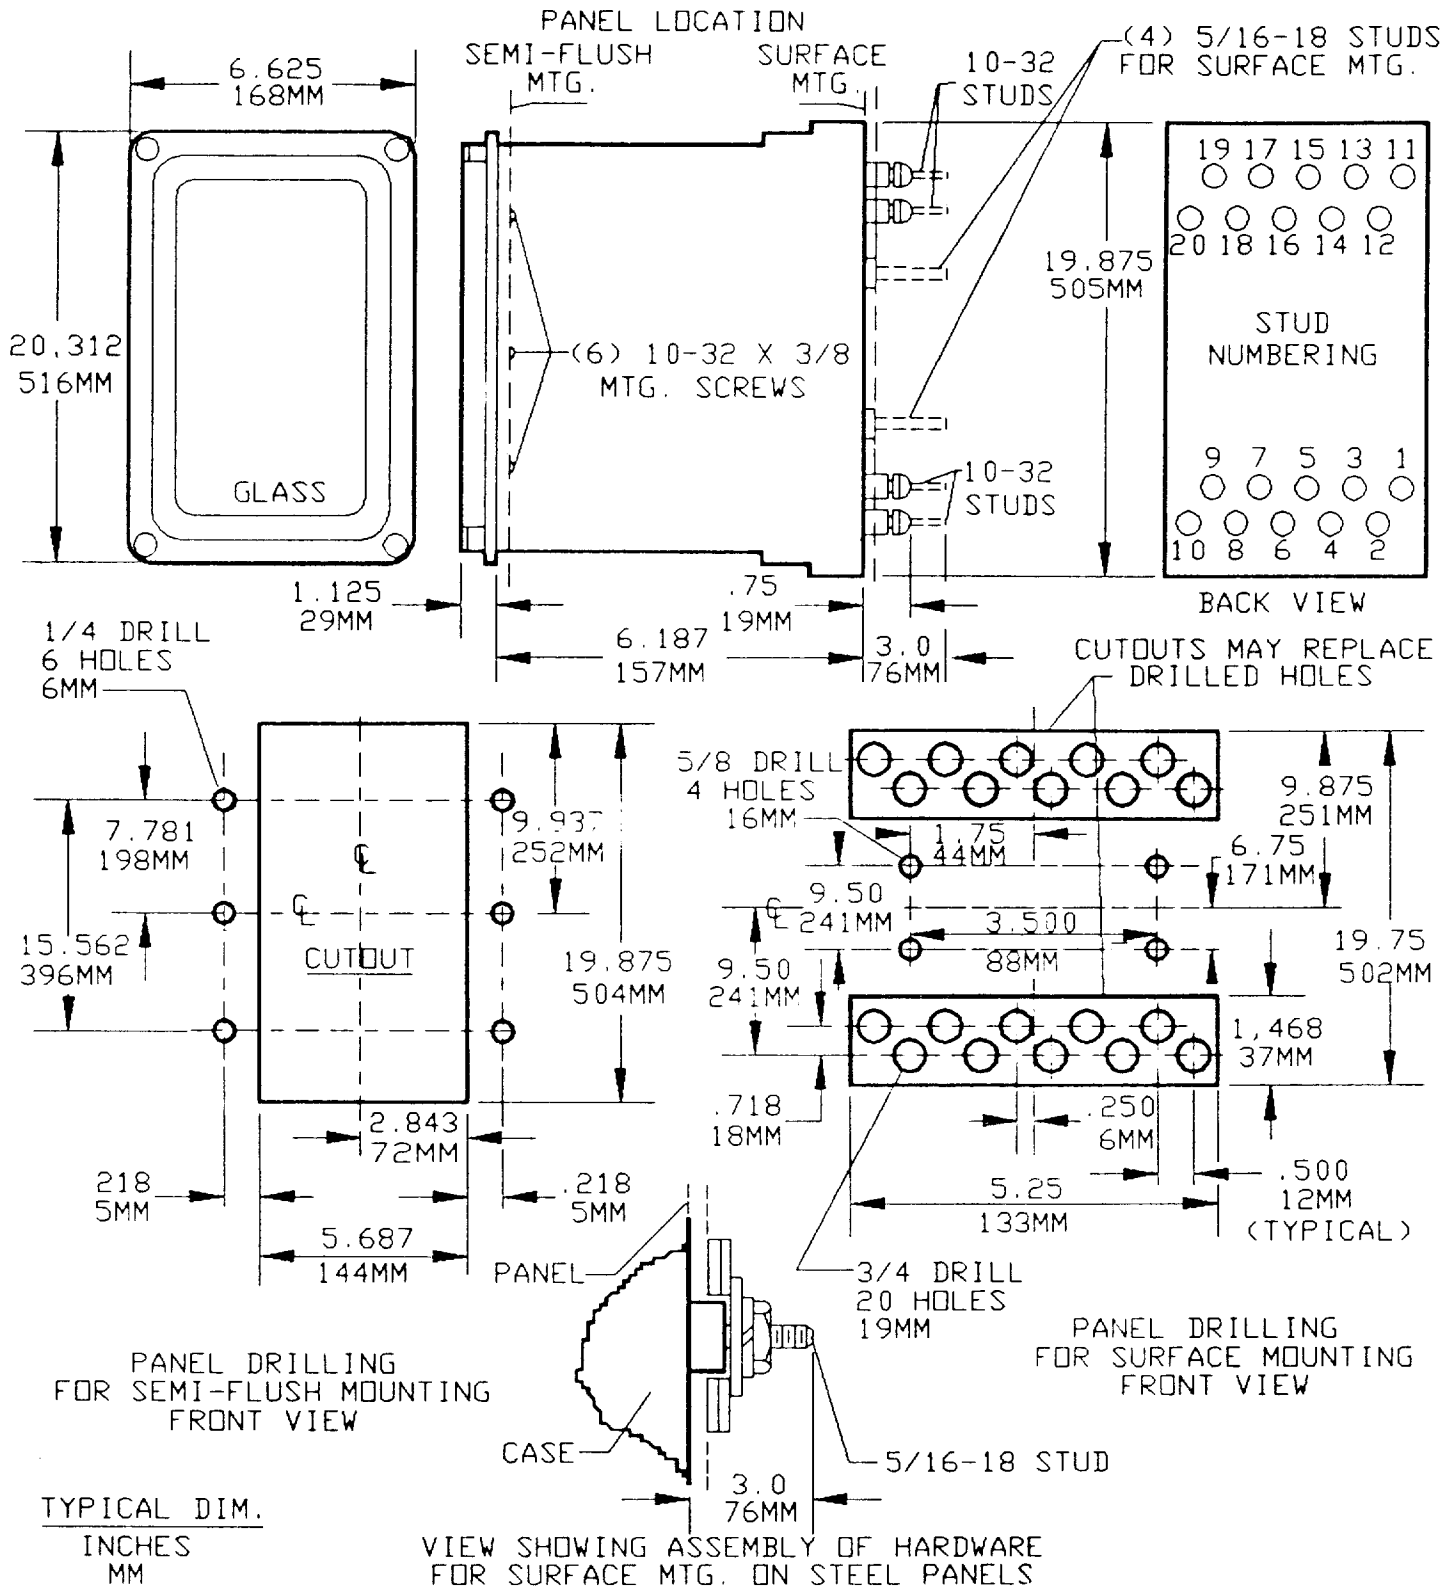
(K-6209276 [5]) Outline and Panel Drilling Dimensions for JBCG Relays
